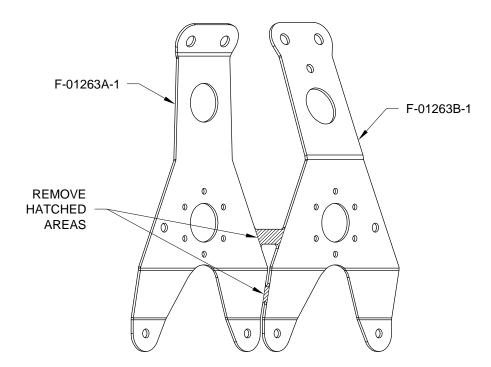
SEPARATING THE FLAPERON MIXER BELLCRANK
